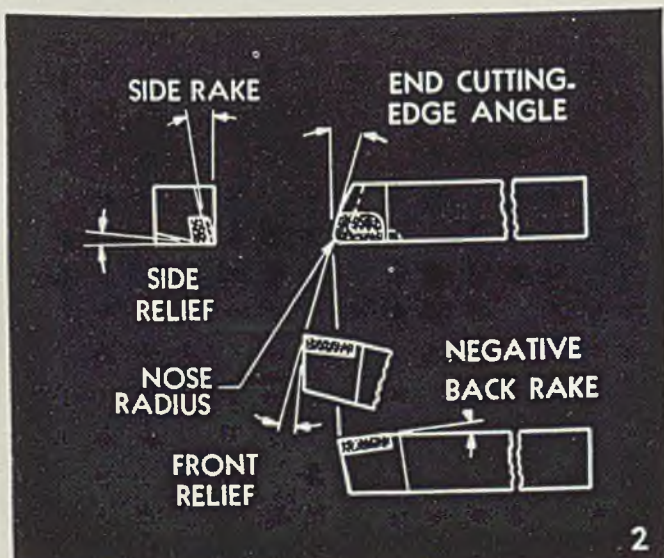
Generally accepted form of tool for roughing out shell from forged blank. Fig. 2—Small negative rake angles as shown in this tool are desirable for handling eccentric or uneven stock as they help take the load off the tool point
